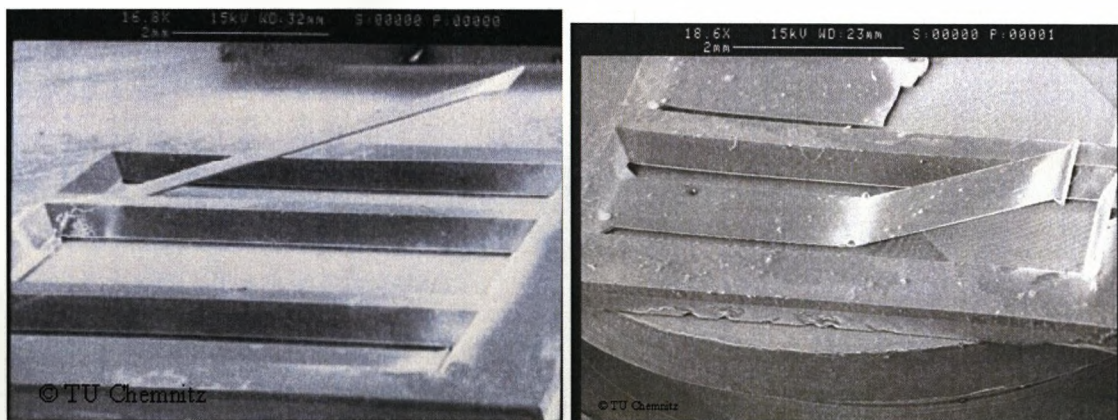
Laser forming of 50 μm thick wet-etch silicon samples [59, 60]
